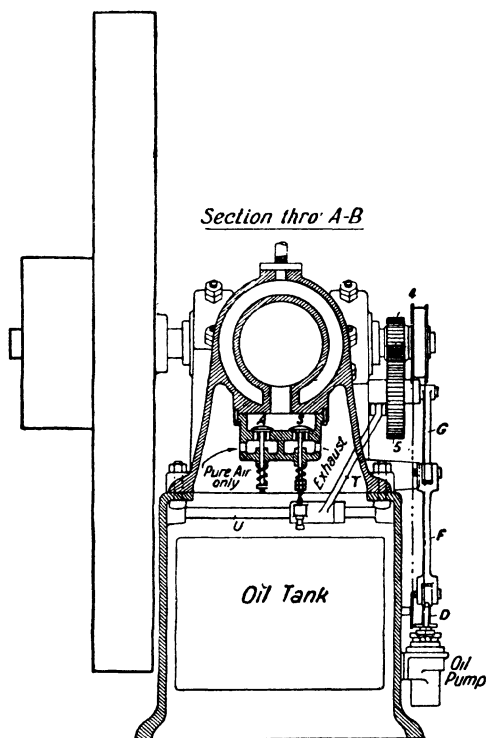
Akroyd Heavy-oil Engine (Section through AB)
